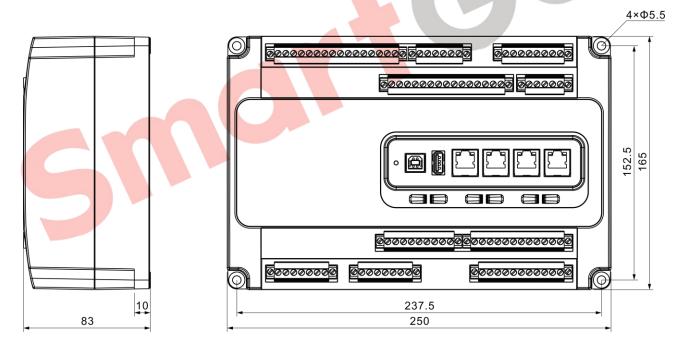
HPM6M Master Control Module Installation Dimensions (Unit: mm)
